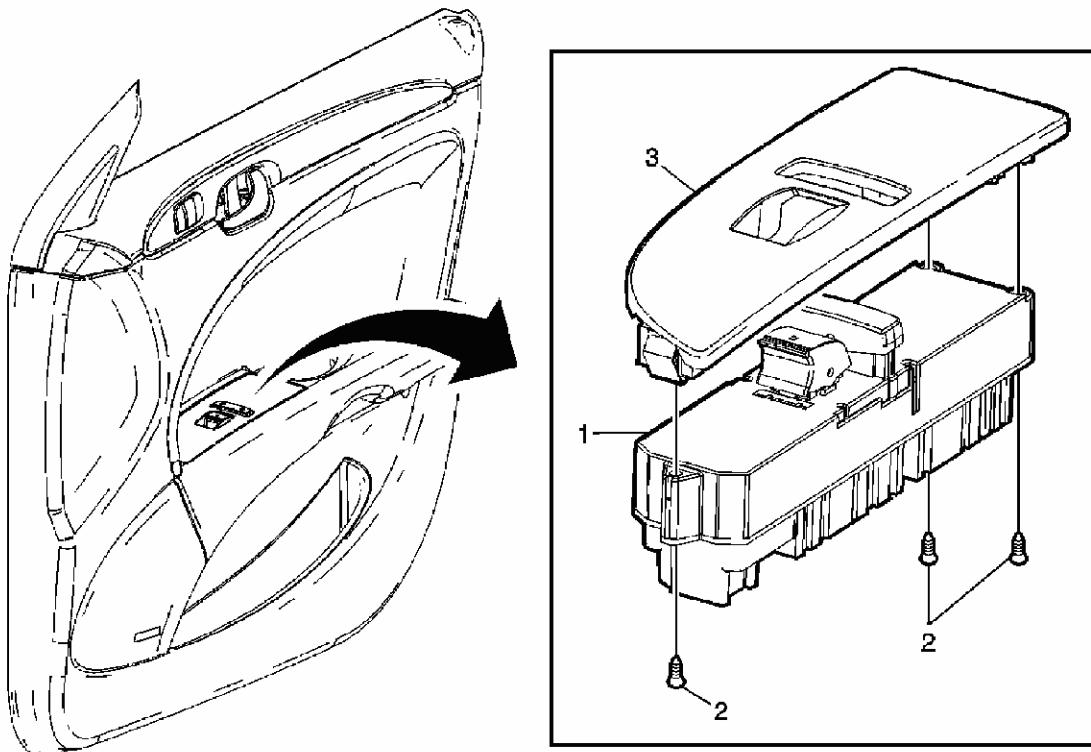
View Of Passenger Side Door Lock and Side Window Switch
